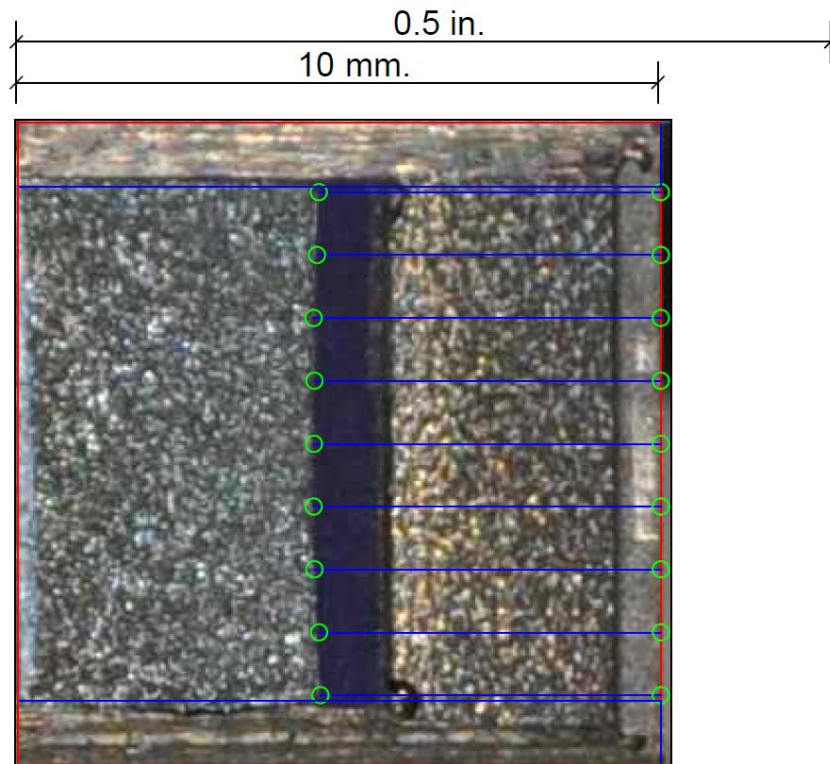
Specimen D16' Fracture Surface
